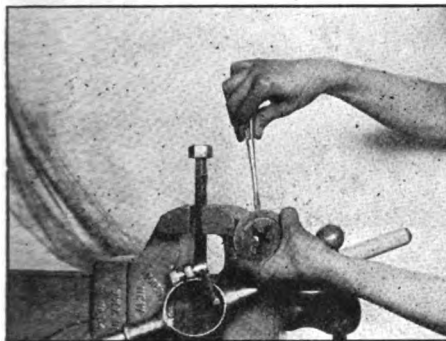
THE DIE MAY BE ADJUSTED WITH A SCREW DRIVER
